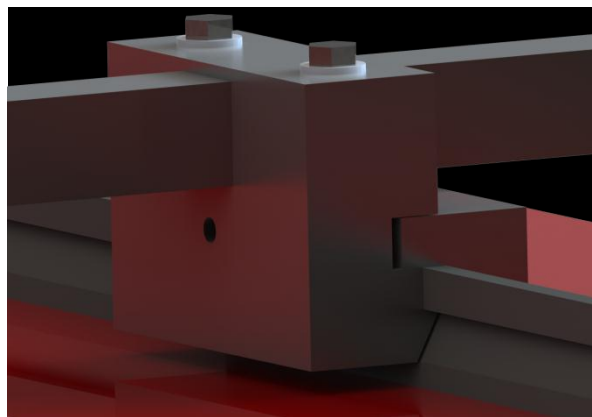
PROTOTYPED FOOT ASSEMBLY
